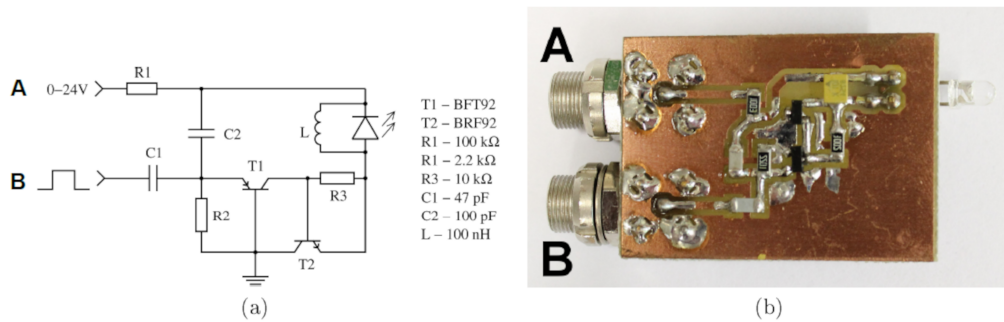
PCB used to drive the pulsing of the UV LEDs. a) Wiring diagram for the PCB used to drive the pulsing of the UV LEDs. b) Manufactured PCB used to drive the pulsing of the UV LEDs. Both taken from [30].
